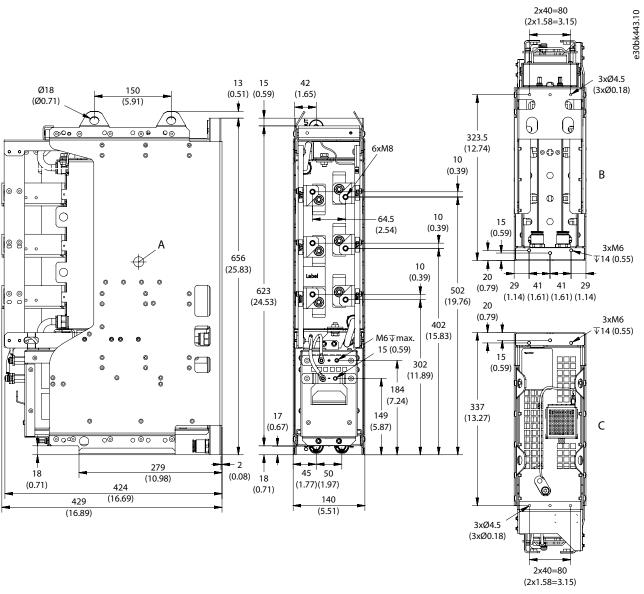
Dimensions of DC Filter DC10L in mm (in)
